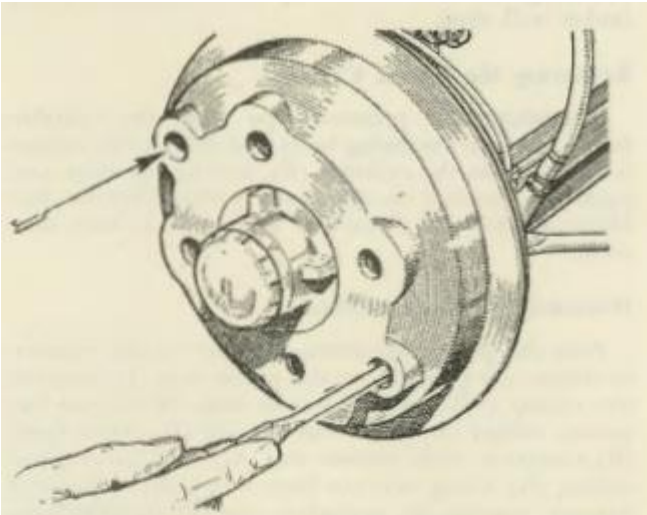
The front brake-shoes are adjusted by engaging the adjusting screws with a screwdriver through the holes provided in the brake-drum. There are separate adjusters for each shoe.
